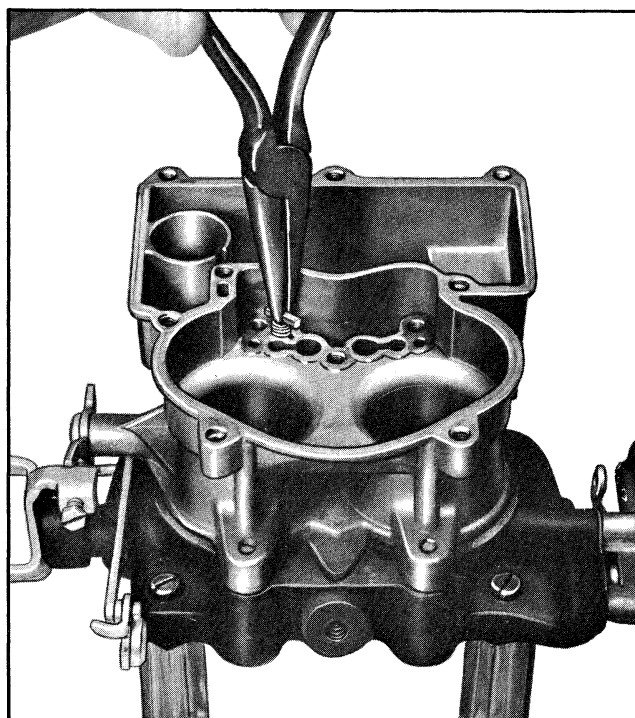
B-49 Removing Pump Discharge Spring Retainer
